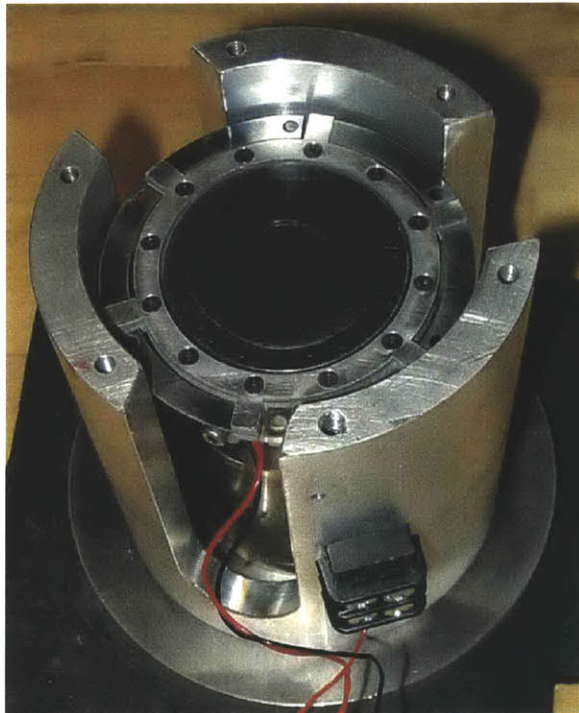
Photograph of the target-flexure-sample-voice coil actuator assembly inside the body.
